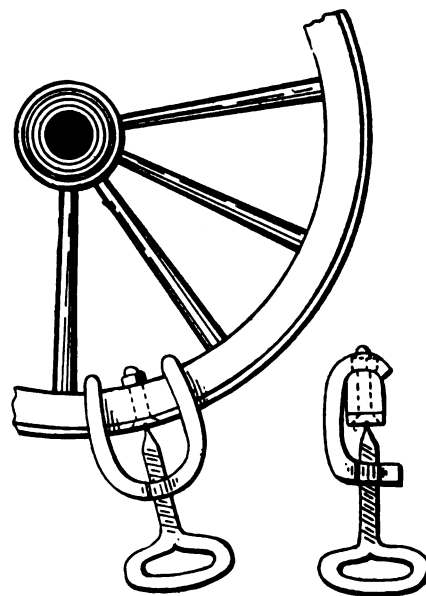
A USEFUL ARRANGEMENT FOR HOLDING TIRE BOLTS.
